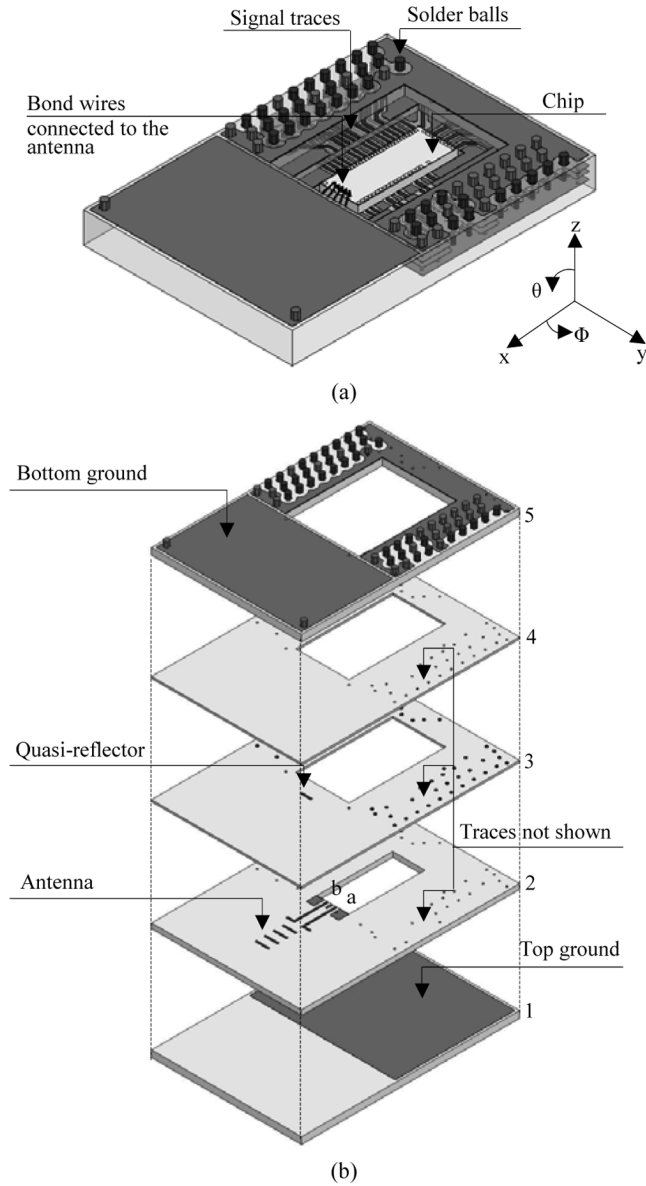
Yagi AiP: (a) bottom view and (b) exploded view.
